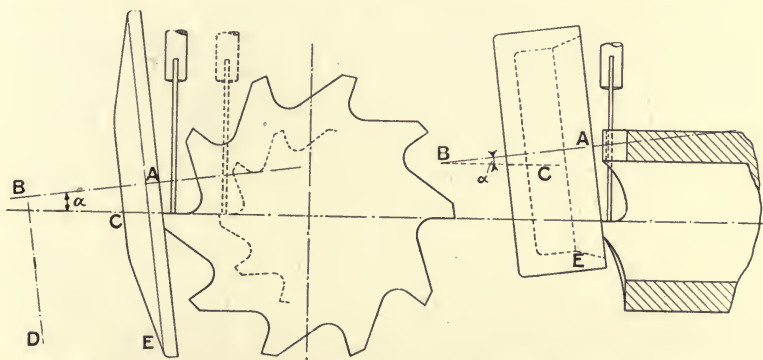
SETTING FOR CLEARANCE WITH CUP WHEEL IN GUEST CUTTER GRINDER
